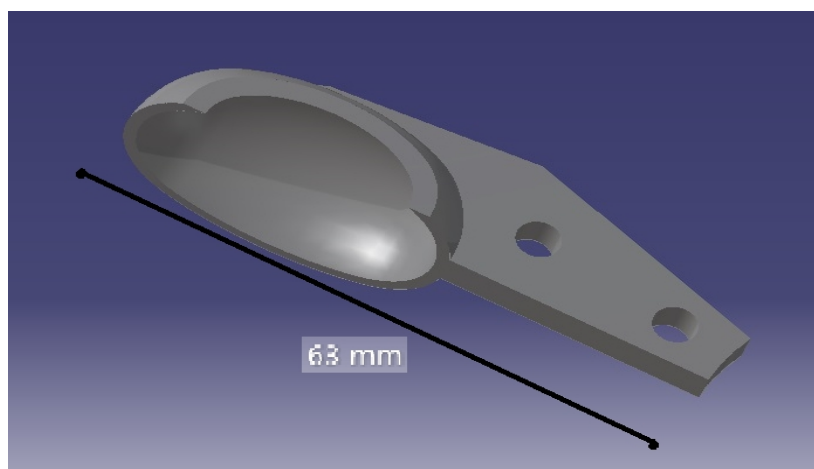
Design Bucket or Blade for Turgo Turbines
